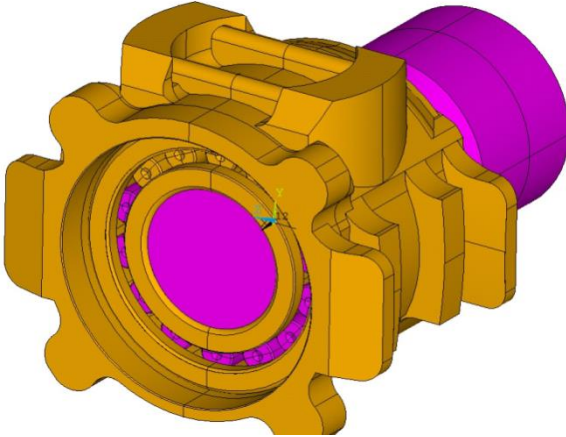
Geometrical model of an axlebox bearing assembly with a double cylindrical bearing
